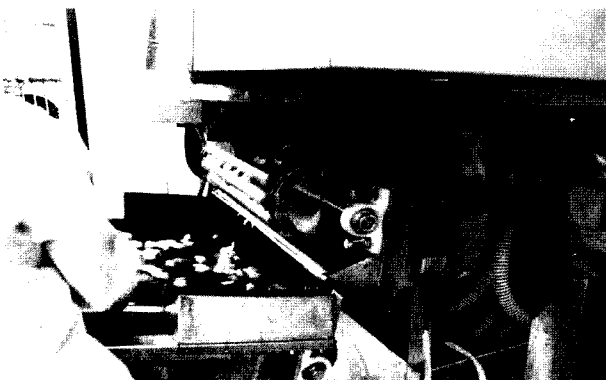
Roller-type conveyor to remove debris by suction fan.
